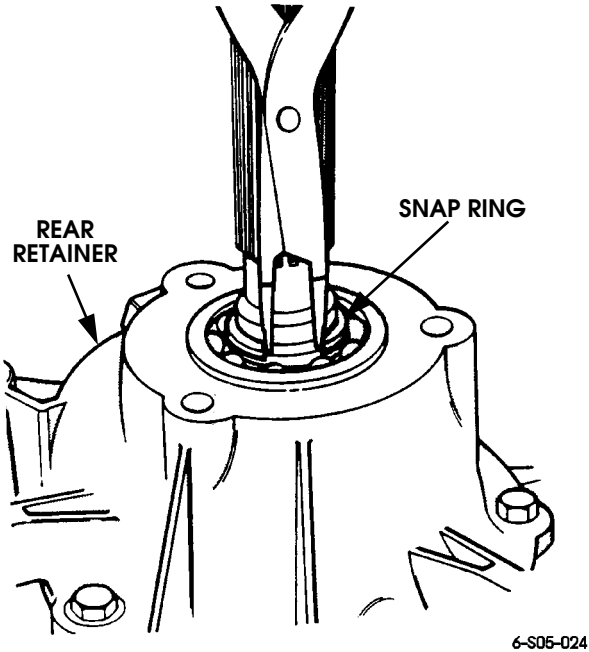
Mainshaft Snap Ring Bearing Removal
